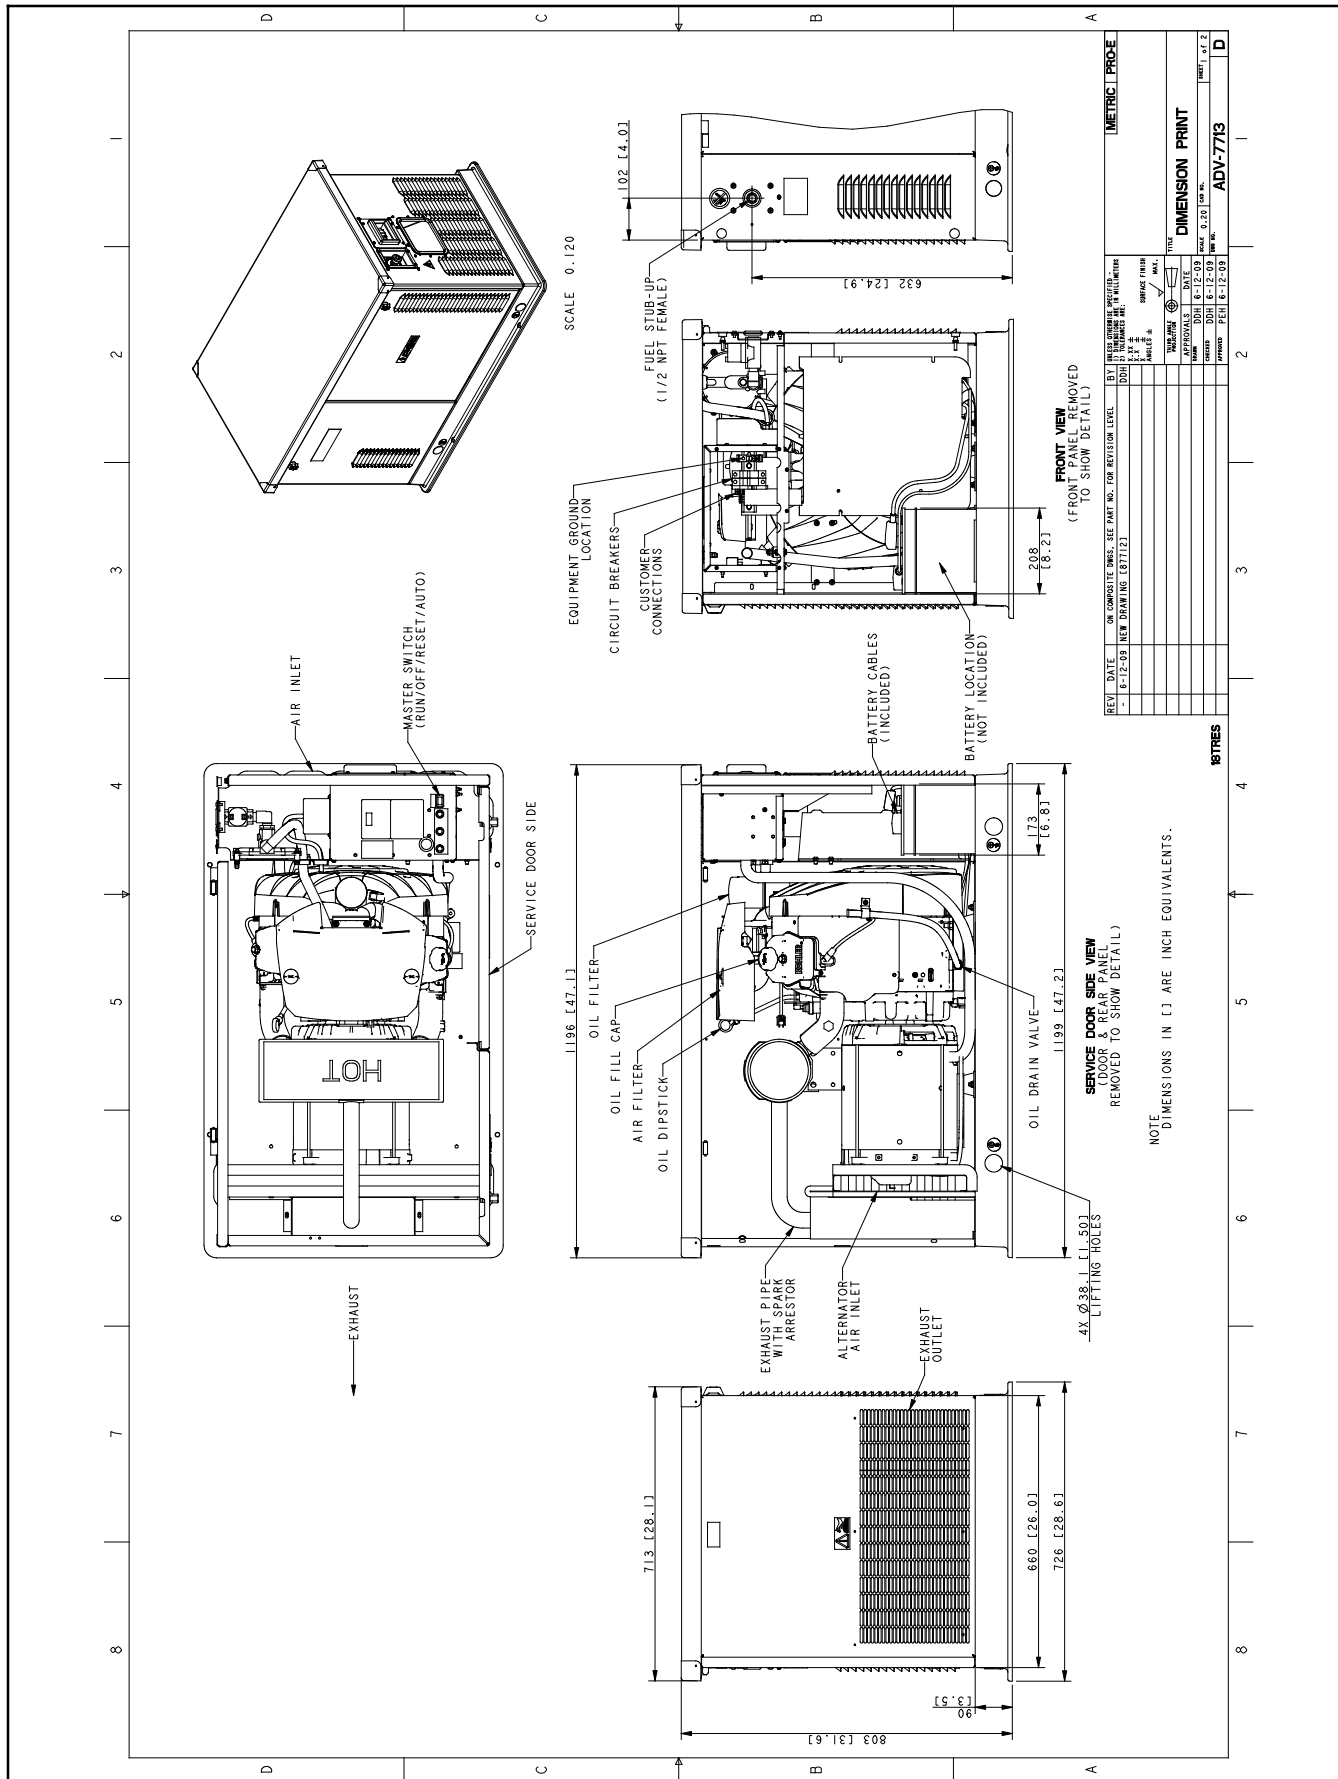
Generator Set Mounting Details and Dimensions, 18TRES (3-phase), ADV-7713, Sheet 1
